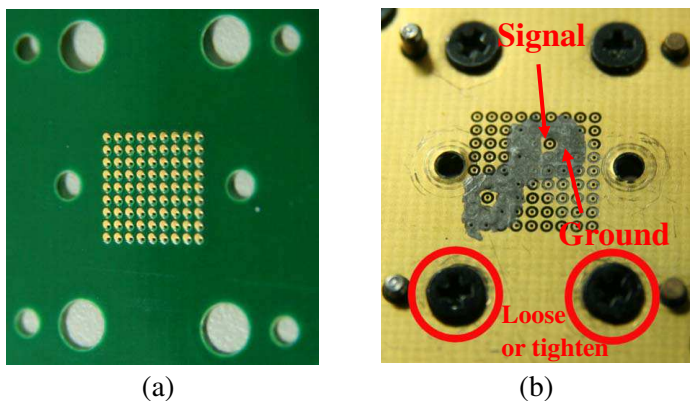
(a) Spring probe side of test fixture. (b) Probing side of test fixture.
